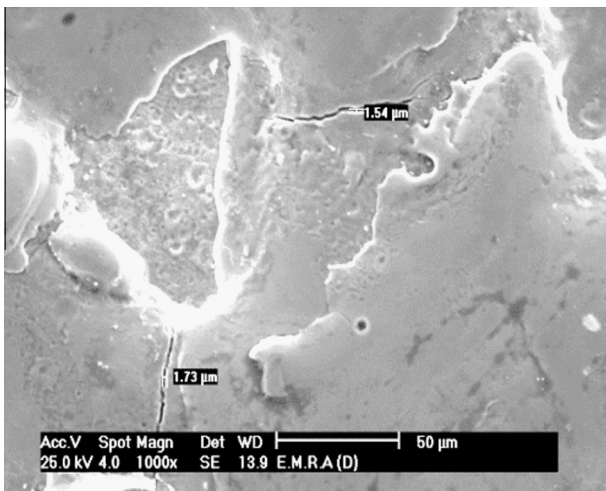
Surface cracks of DIN 1.2379 rough machining using POCO graphite EDMC-3 electrode.
